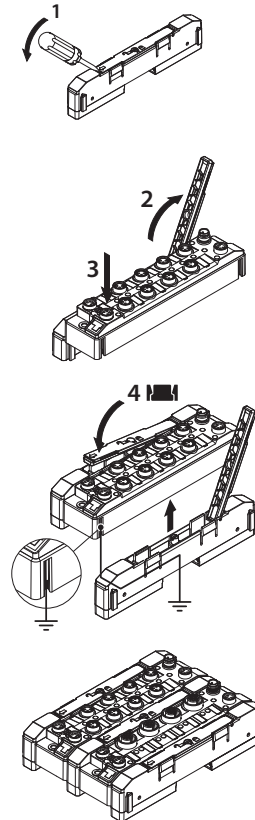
Module groups for mounting on a DIN rail (TS35)
